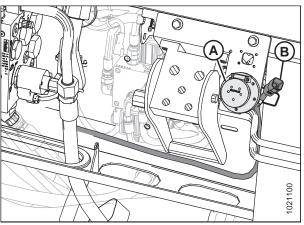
Valve Driver Harness Connection – Case New Holland Shown
